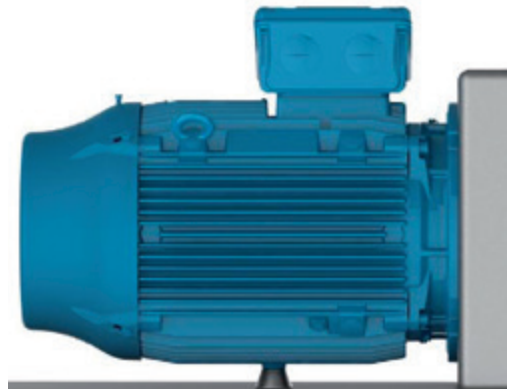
Mounting method of flange mounted motors with frame base support
